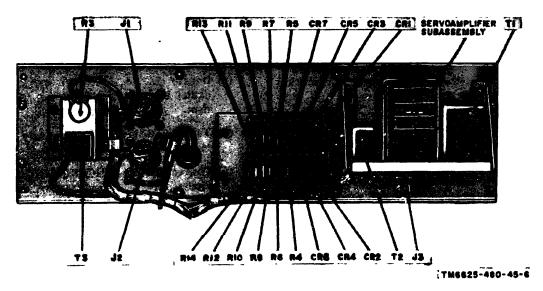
Test Set AN/ASM-111 rear panel assembly, parts locations.
